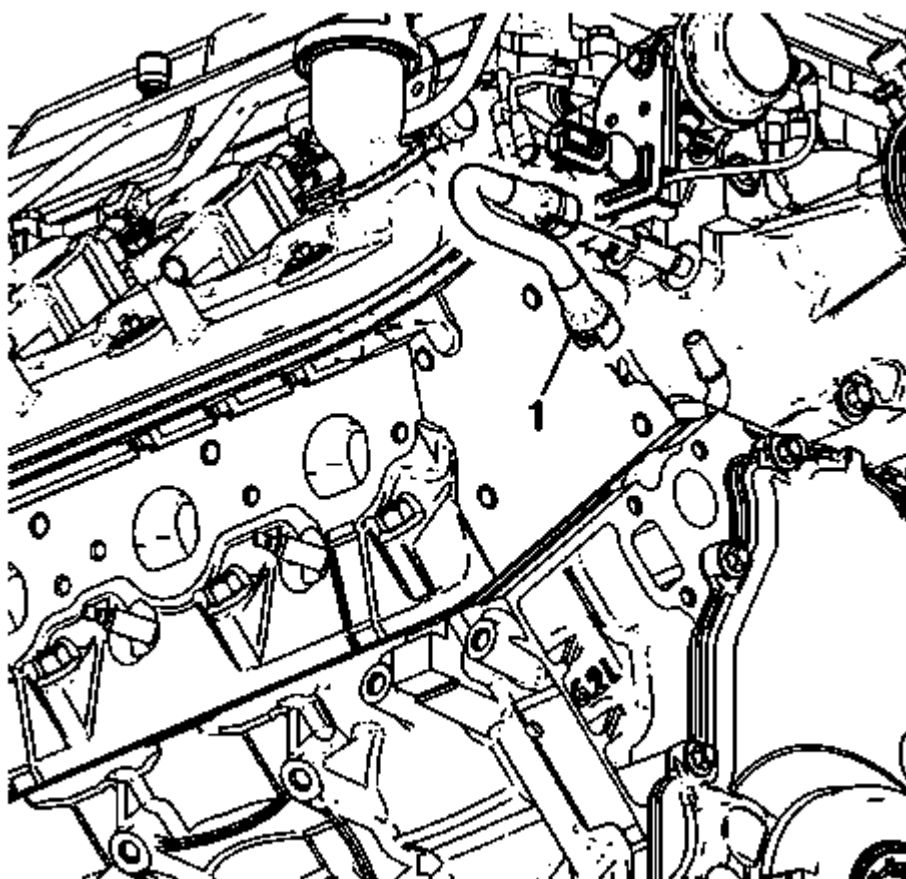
Identifying Positive Crankcase Ventilation Dirty Air Hose
